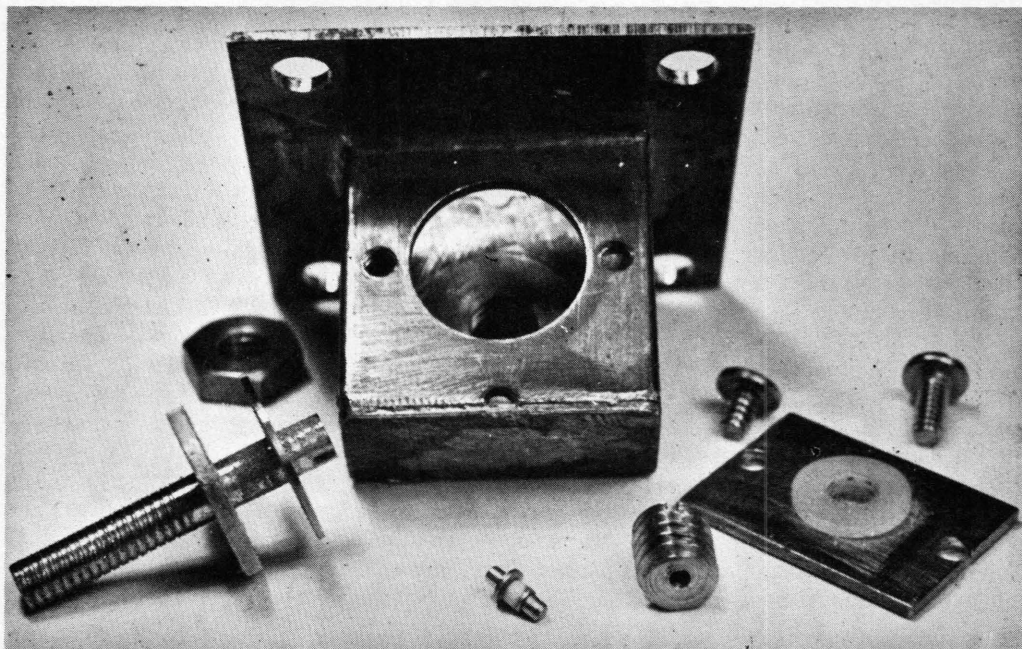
Photo B. Gunn effect oscillator assembly parts. Not shown is the cover iris to the waveguide flange.
